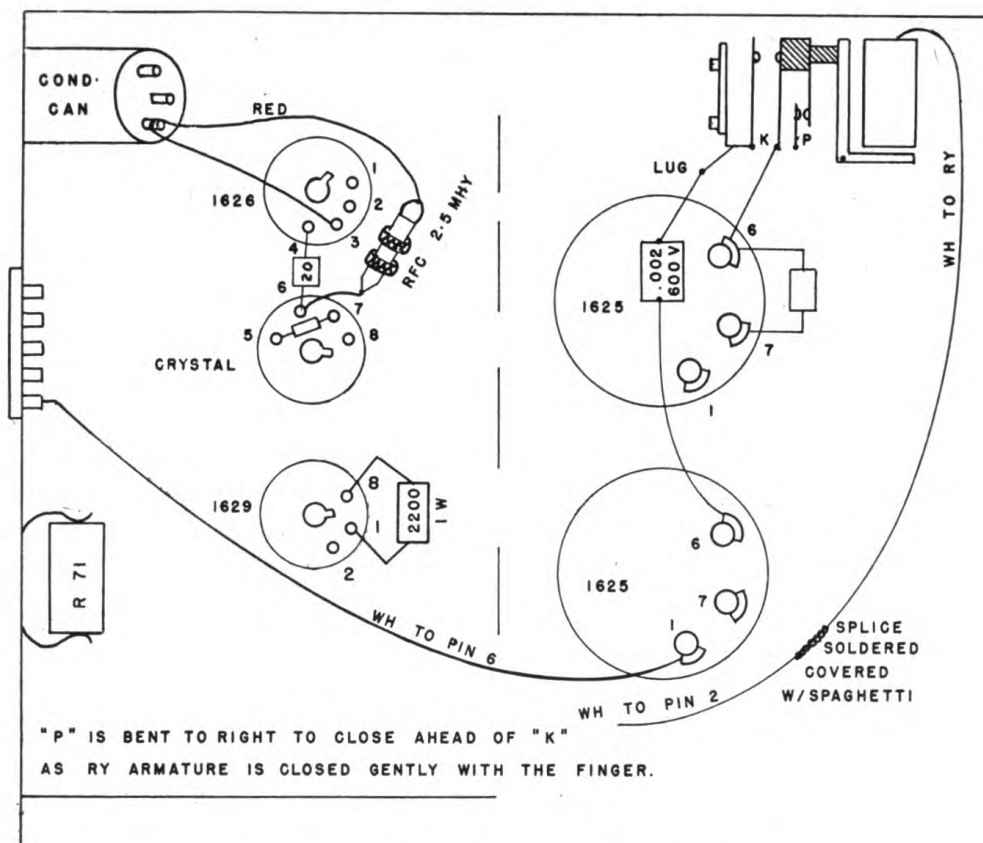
UNDER CHASSIS VIEW AFTER CONVERSION.
